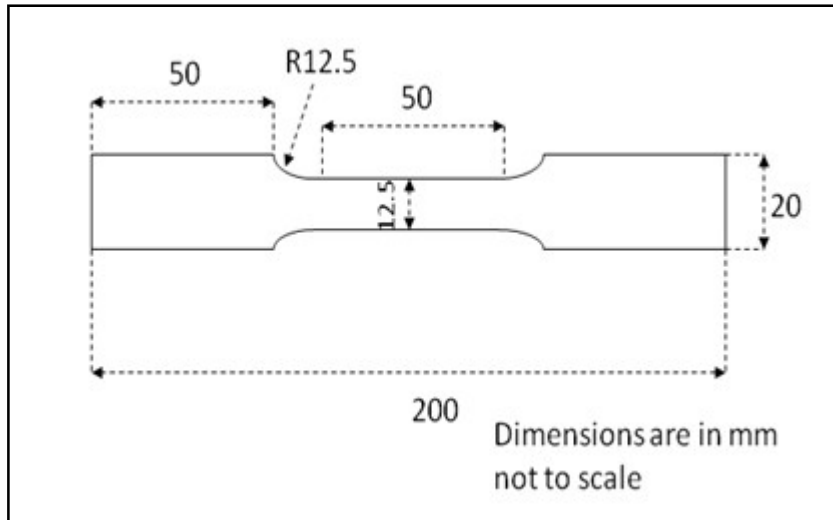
Dimensions of Tensile specimen (ASTM E8)
